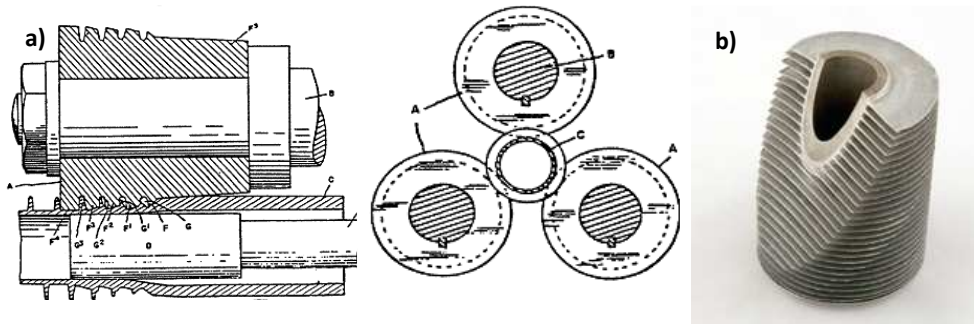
Sketch of finned tube rolling process (a) [6], rolled bimetallic finned-tube (b) [7]
